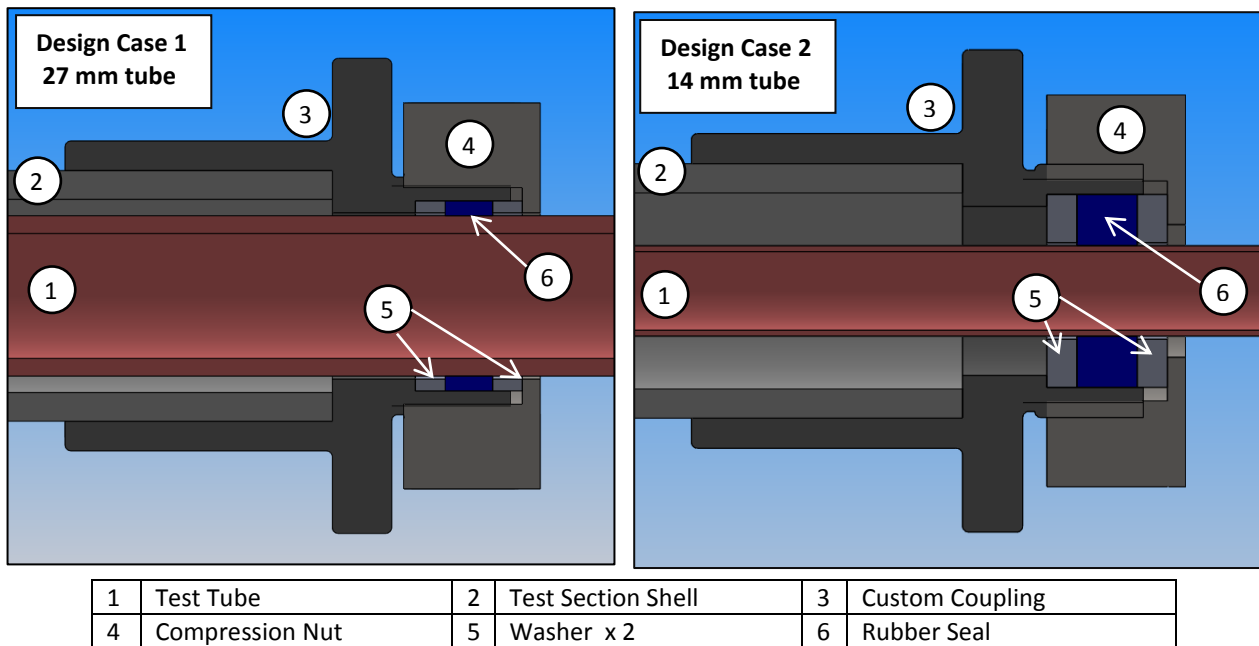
Custom compression coupling that seals between the test tube and test section
